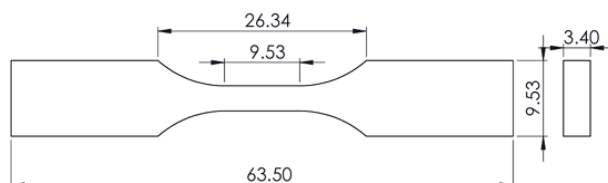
ASTM D638 Type V (Tensile Test), the standard specimen dimensions in millimeters (mm)
